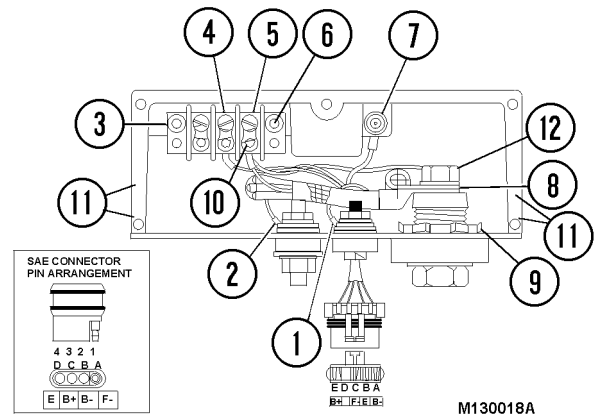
CONTROL UNIT ASSEMBLY
